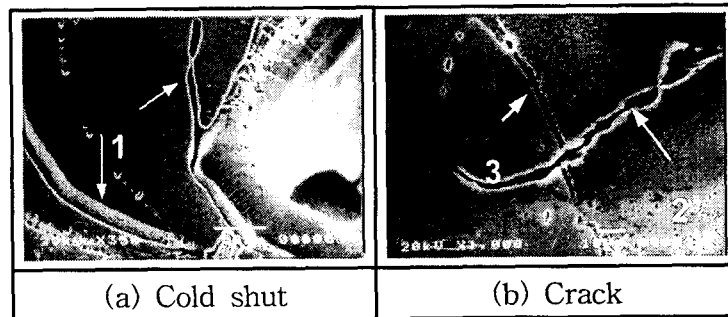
Fractographs of welding fusion zone in 7N01 Al alloy
